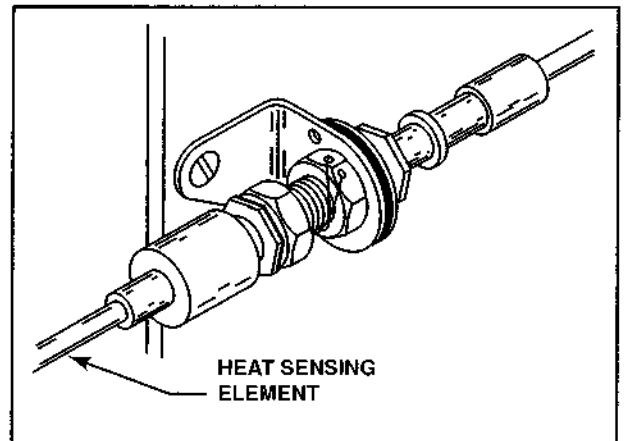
When inspecting an electrical connector joint, verify that the retaining nut is properly tightened and that the safety wire is secure.
